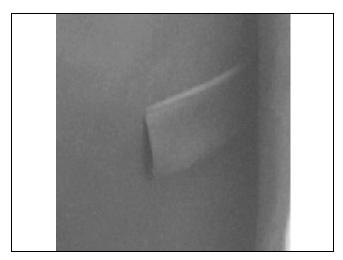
Jacket with Fillet and Flap Defect Remedied
